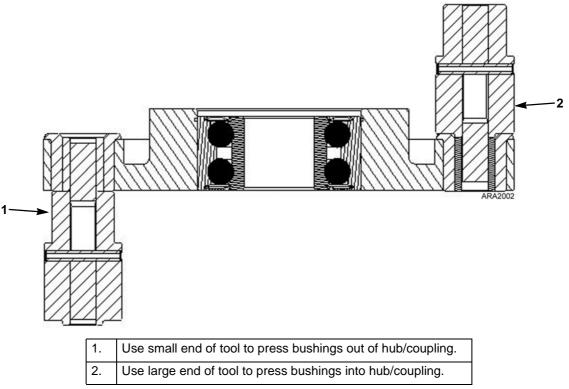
Bushing Replacement with Bushing Replacement Tool 204-1955
